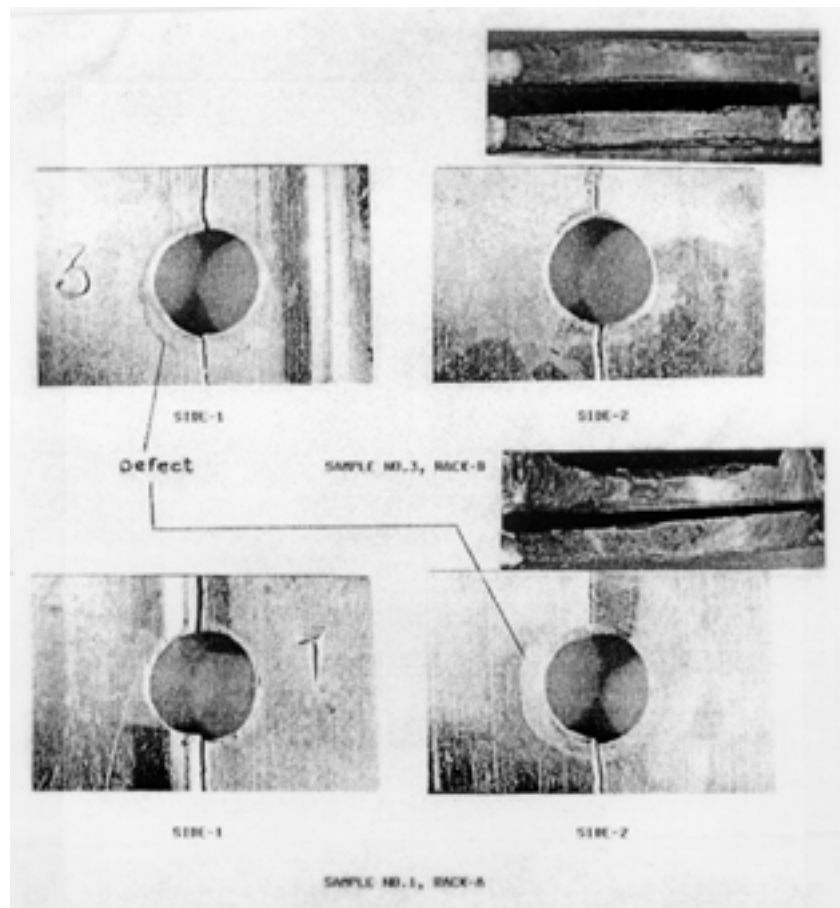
Damage at the edge of the hole in the aluminium corrosion coupons from the test racks and their cross sections at the midpoint.
